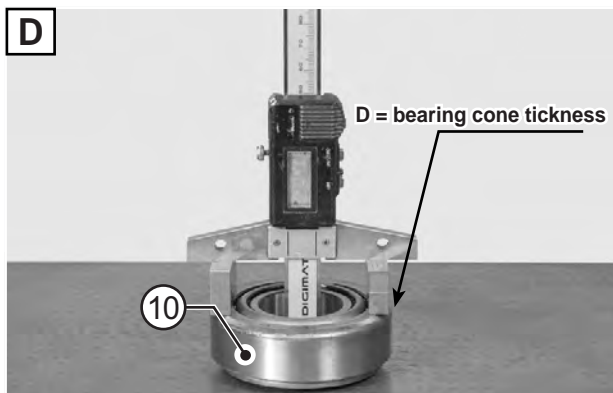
With a calibrated block on a faceplate, allow the bearing cone to set by rotating them in both directions and by applying a vertical thrust position the calibrated block on the external bearing cups. Check overall thickness of bearing. $D = 42,25$ mm
